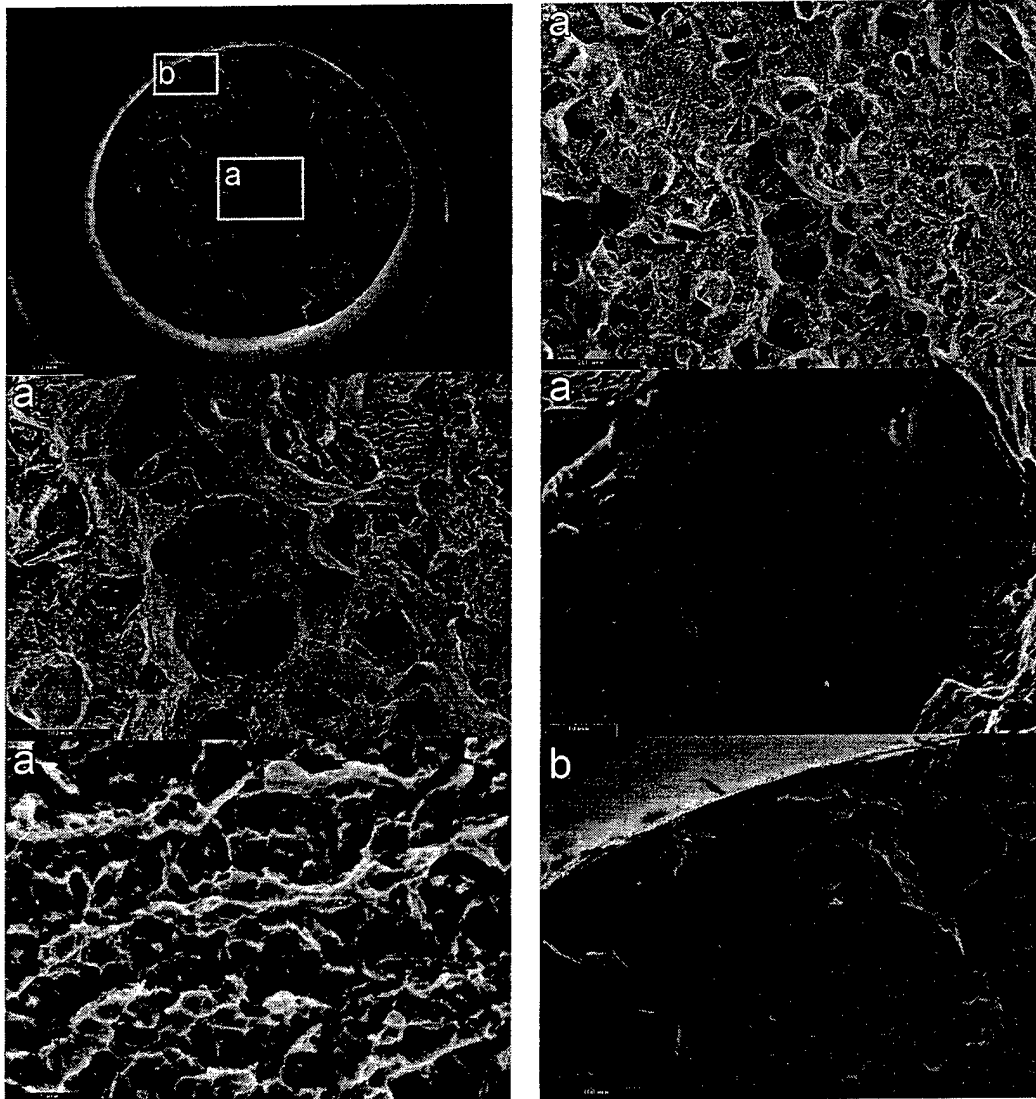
Fracture surface of VT22 in RR condition #4 (table 12, aging at 560°C, 8h, heating rate to aging temperature 20 Ks⁻¹).
